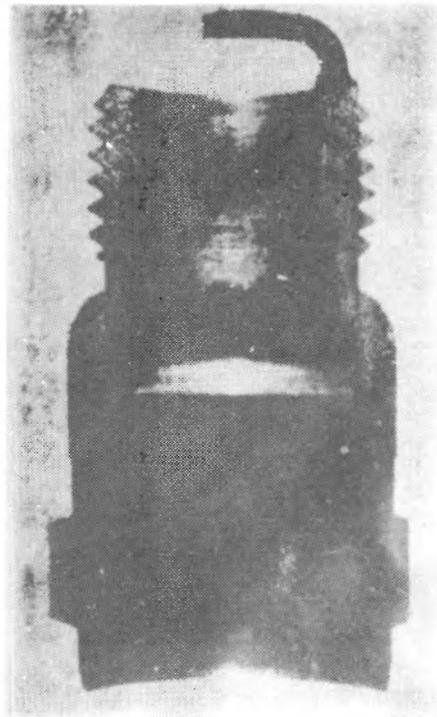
Nickel electrode laser welded to cold-rolled spark plug body
